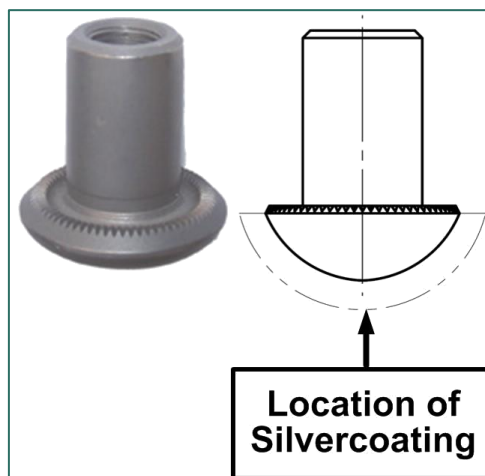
MUTARS® END PIECE – LOCATION OF SILVER COATING
